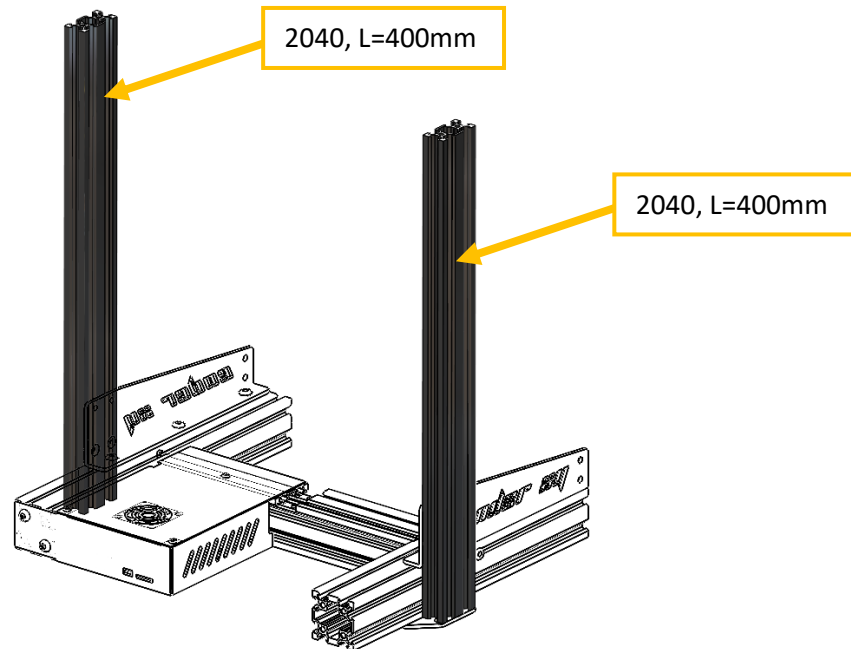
Installing 2040 Alu extrusions to the bottom frame
